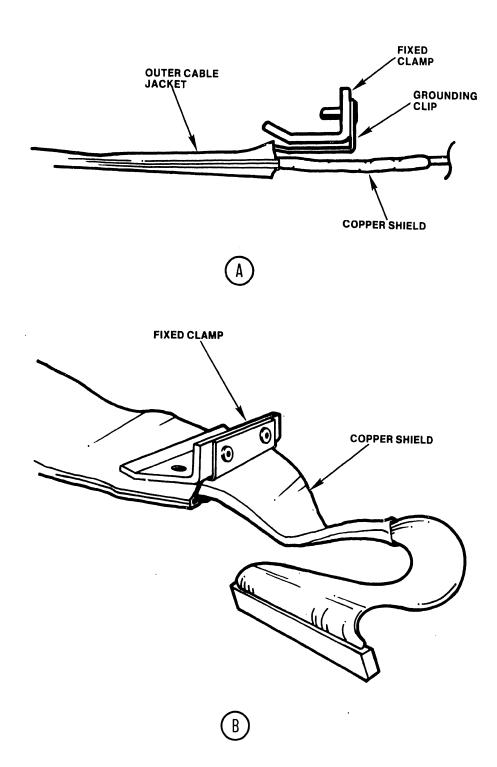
Shielded Cable Installation (Sheet 1 of 3)
